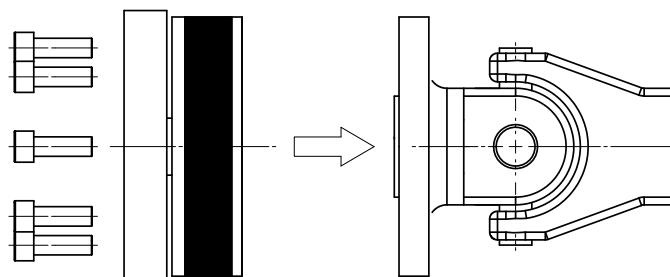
Coupling Mounting to Measuring Flange (TF 213 – 219)
